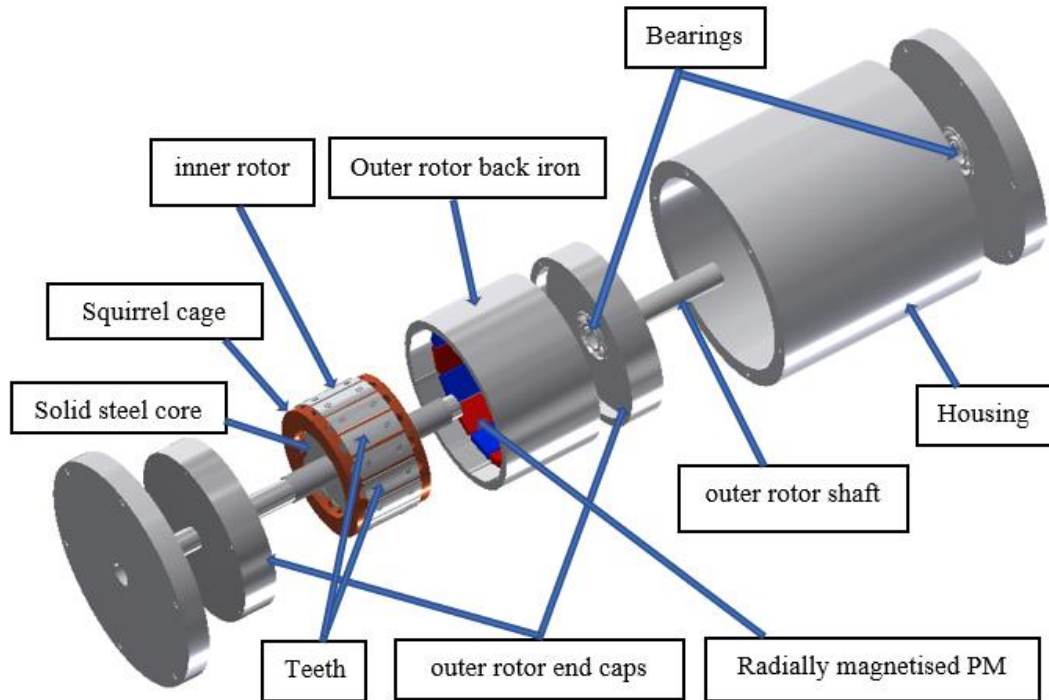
1 3d exploded view of the SC PMEEC prototype.
